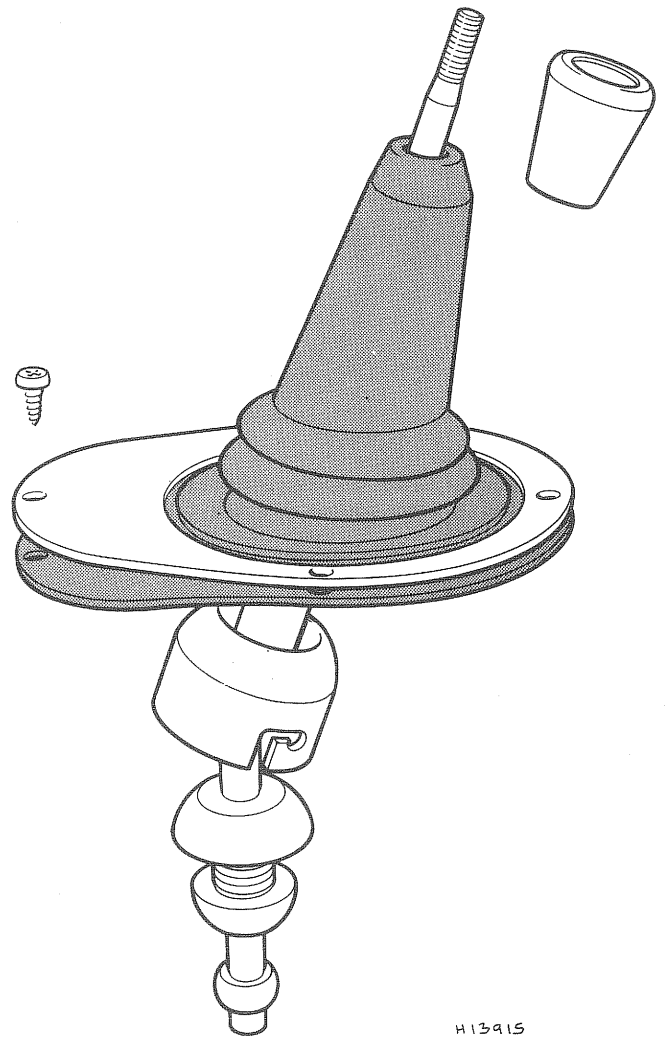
The remote control gear lever assembly used with the rod-change transmission (Sec 13)
